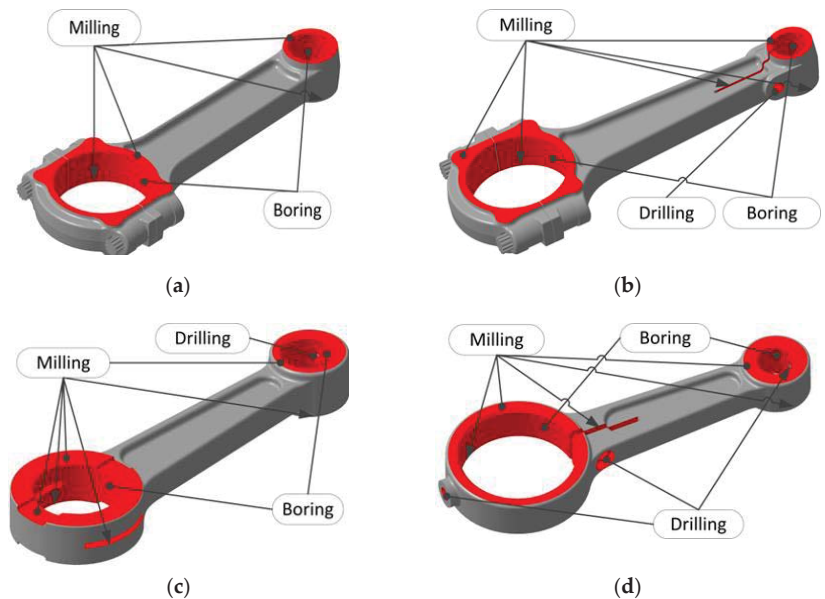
The designs of connecting rods with machined surfaces: (a) Detachable connecting rods; (b) Detachable clip connecting rods; (c) One-piece connecting rods; (d) One-piece clip connecting rods.
